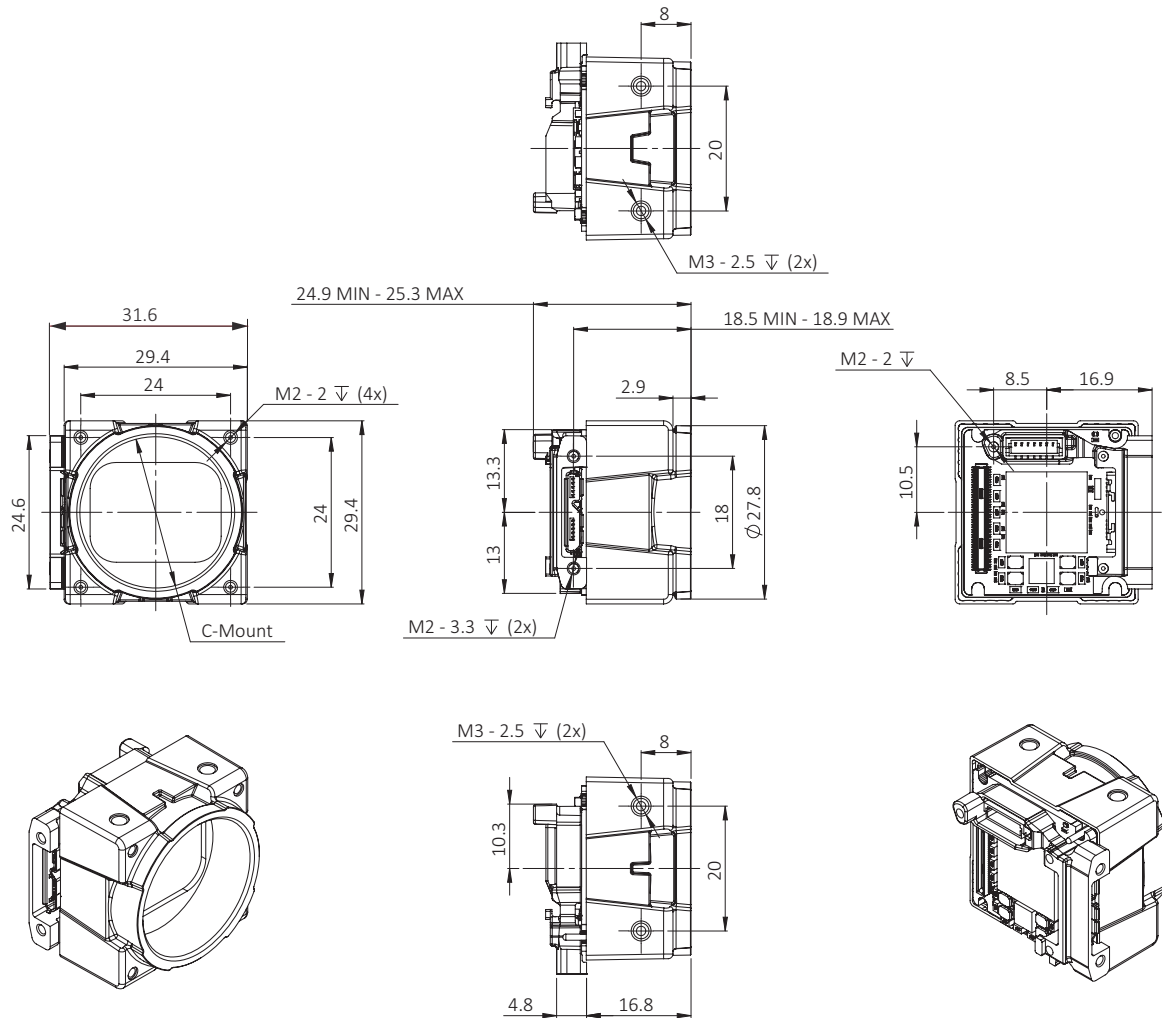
Dimensions for USB 90° | open housing, |CS-Mount
